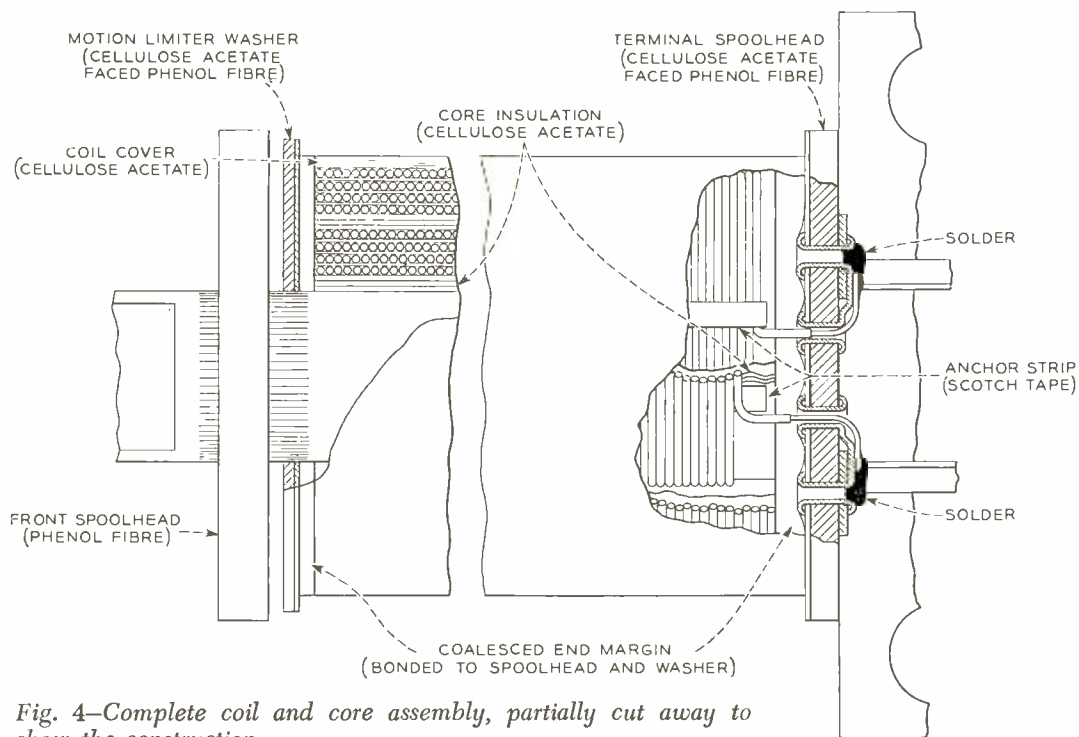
Complete coil and core assembly, partially cut away to show the construction.
